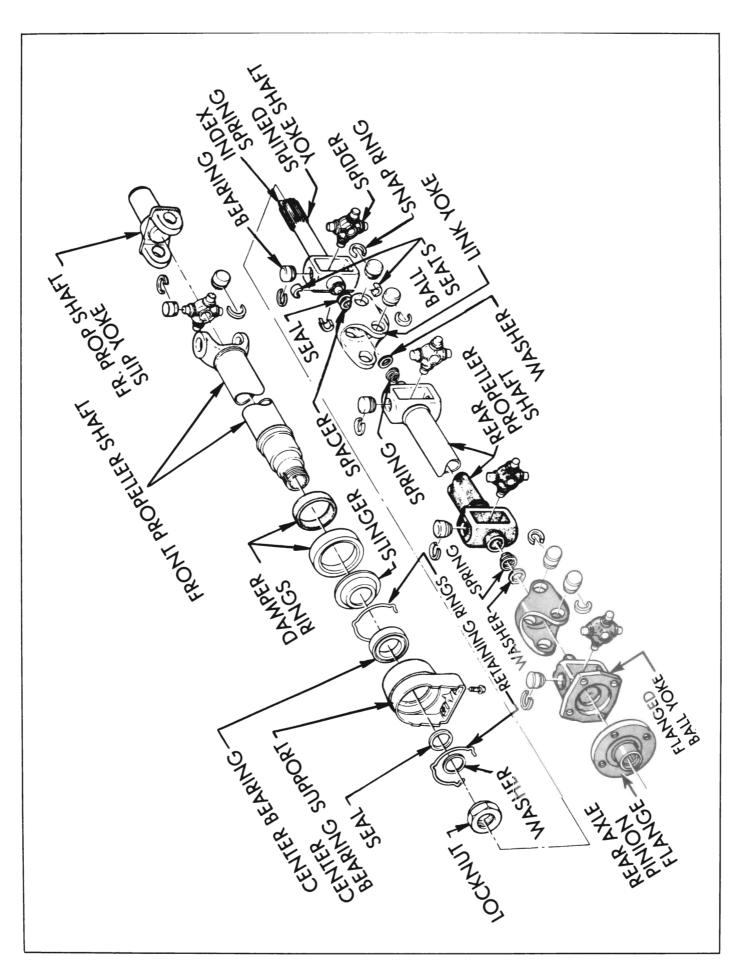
Exploded View—Propeller Shaft—4700 Series
